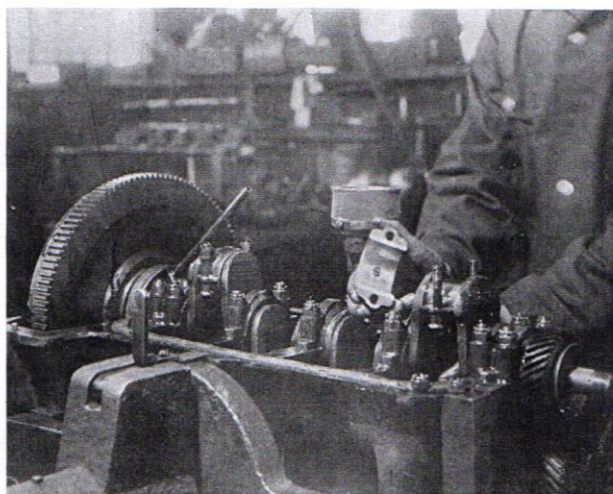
Removing Connecting Rods. Hold rod in position when backing off nuts and removing cap.
